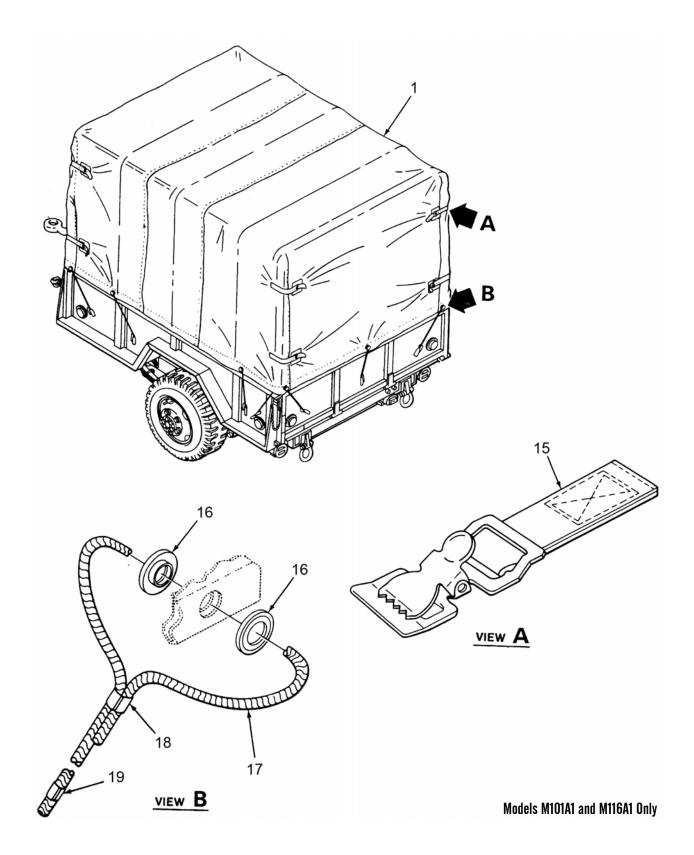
Canvas Cover Assembly and Bows (Sheet 2 of 2)
